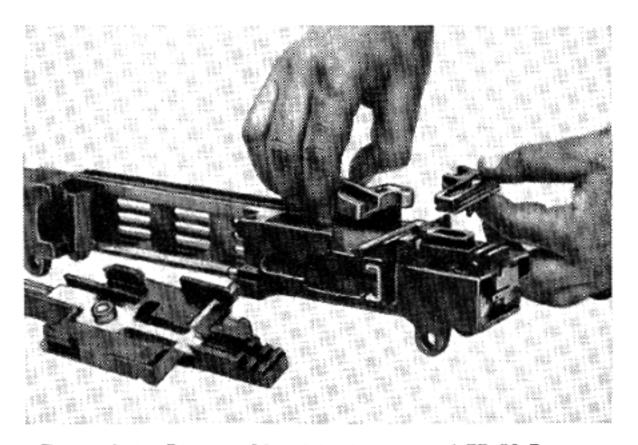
Disassembly of feed system of ZB-80 Powerdriven Machine Gun.
